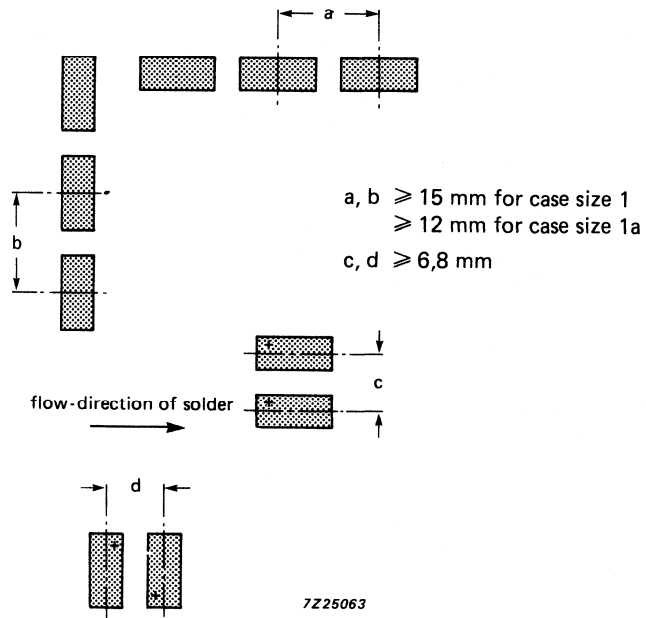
Minimum distances between 2222 085 SMD capacitors on a printed-circuit board for wave soldering. Flow direction of solder preferably onto side-walls or onto plus-side of the capacitors.
